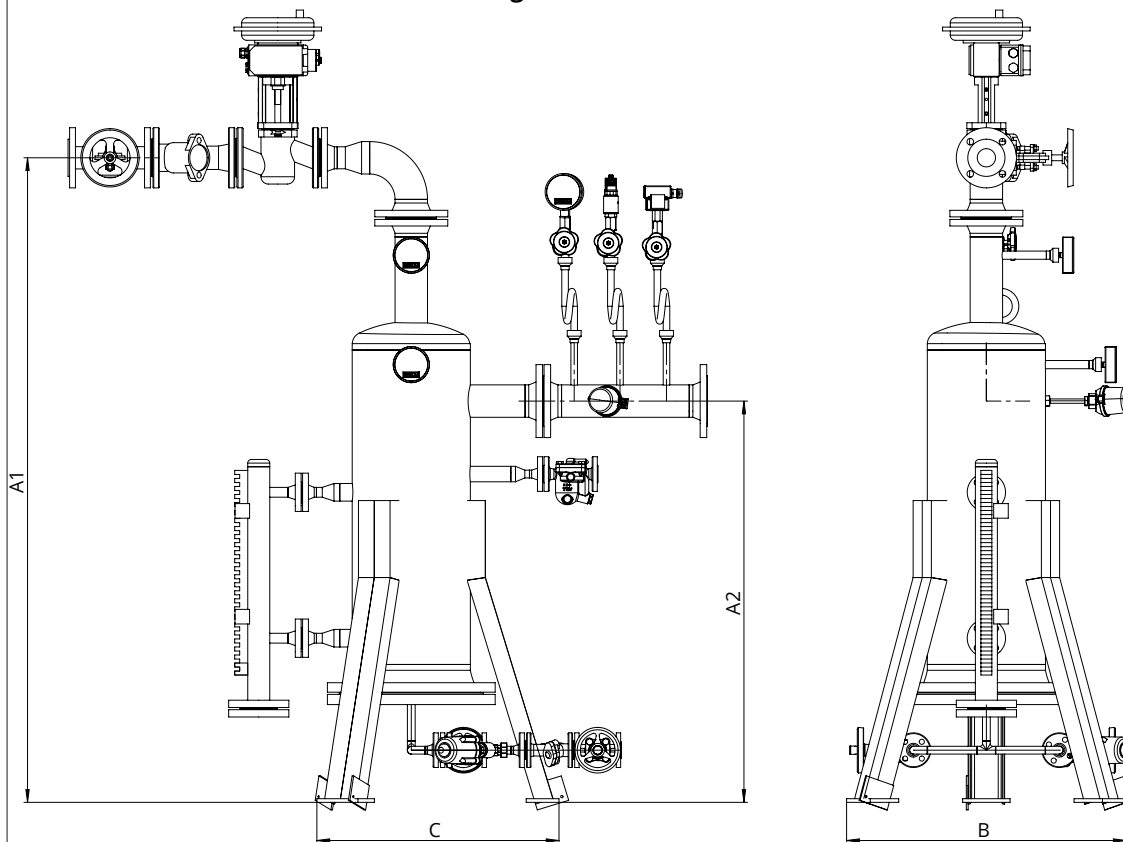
Dimensional drawings: Skid-mounted Type 7110 · Type 7110 mounted on feet
